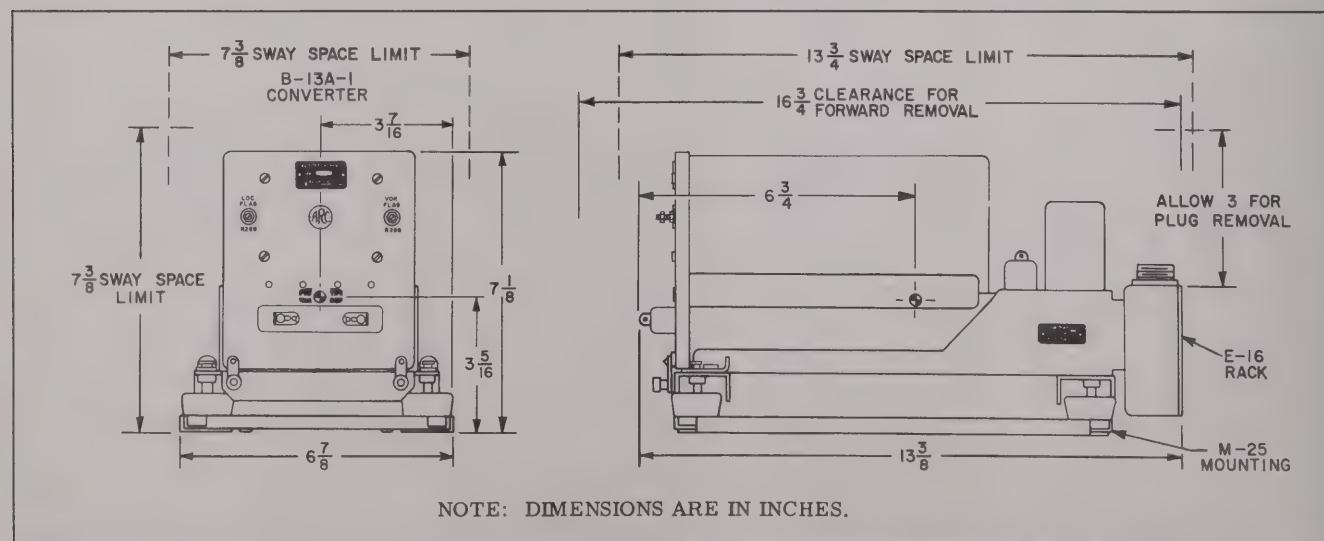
E-16 Rack and M-25 Mounting, Installation Dimensions
